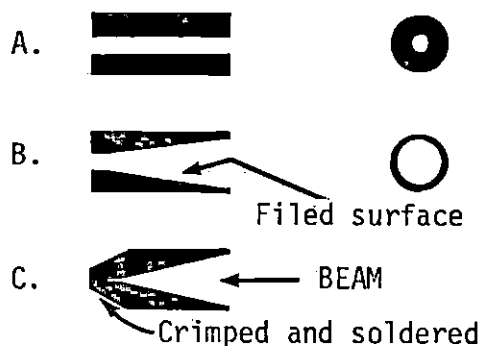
Beam-trap. A. copper tubing with its cross-section. B. copper tubing after filing. C. crimped and soldered beam-trap.
